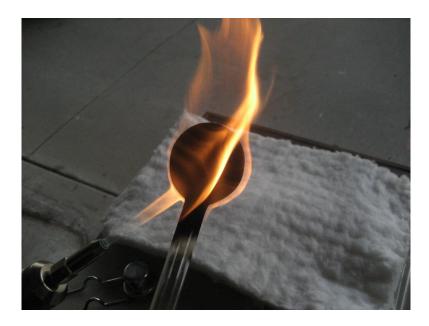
Hand annealing a large 50mm bulb in a gassy flame
